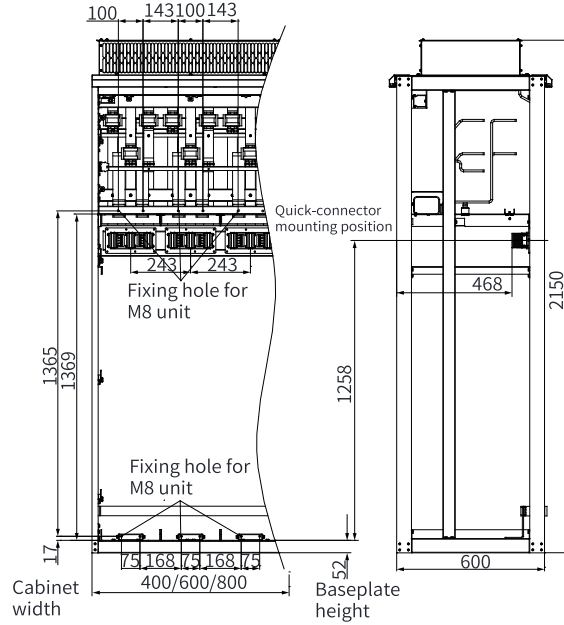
Dimensions of basic power supply cabinets (mm)
